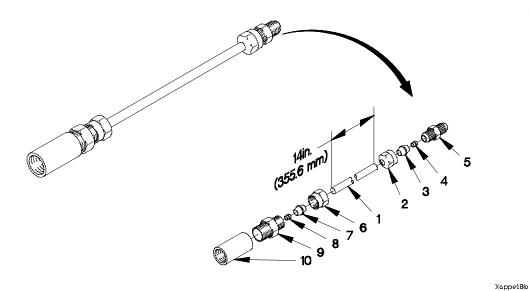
M1089 30K Winch Pneumatic Test Adapter
